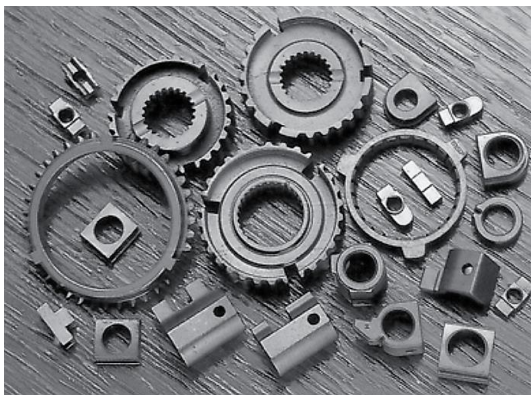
Gear box/transmission (clutch hub, gear shifting yokes etc.). [62]
